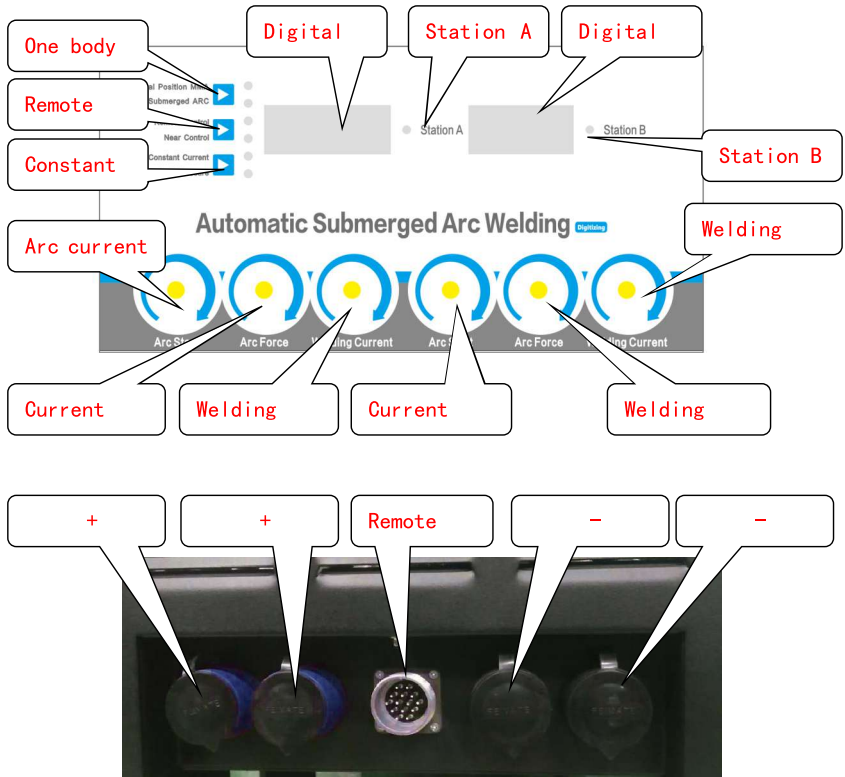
Lower panel diagram of MZ series arc welding power supply
